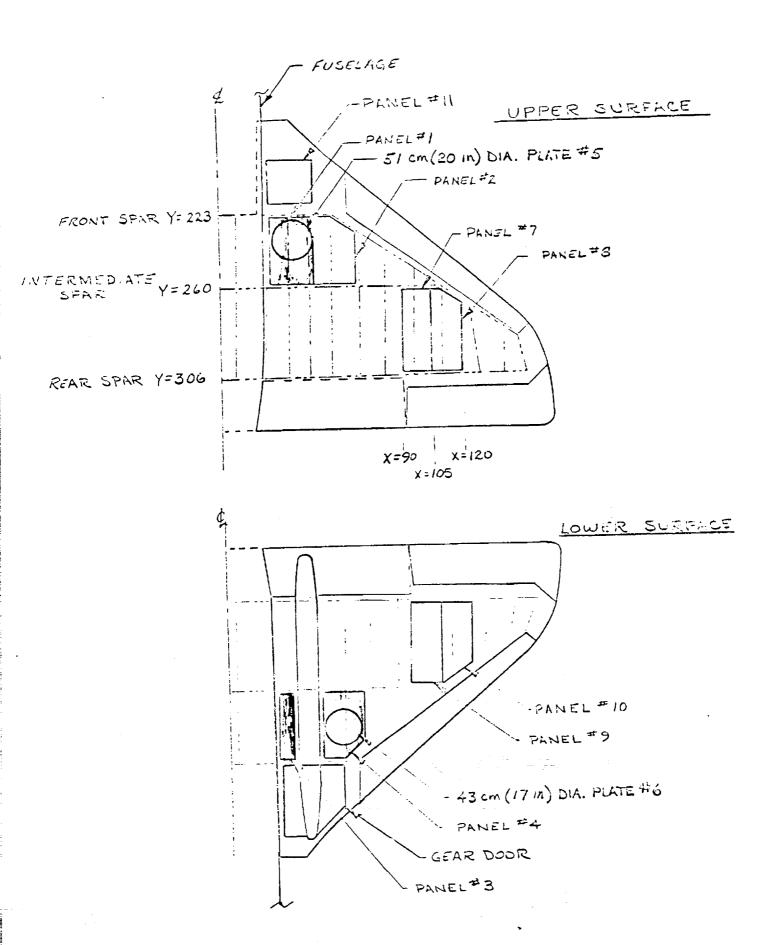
HOLE CONFIGURATION #2. PANELS 1,3,4 AND PLATES 5&6 REMOVED
